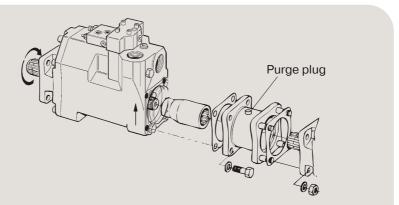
Adaptor kit (P/N 379 7795) for tandem coupling.
